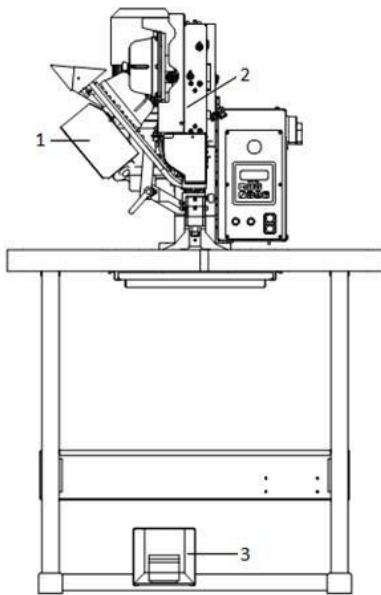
Automatic eyelet, rivet and trim machine - front view detail
